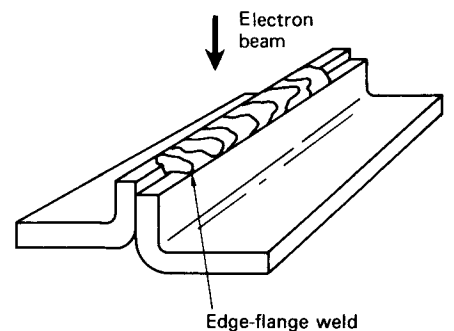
Edge-flange weld typically used to join thin panels
